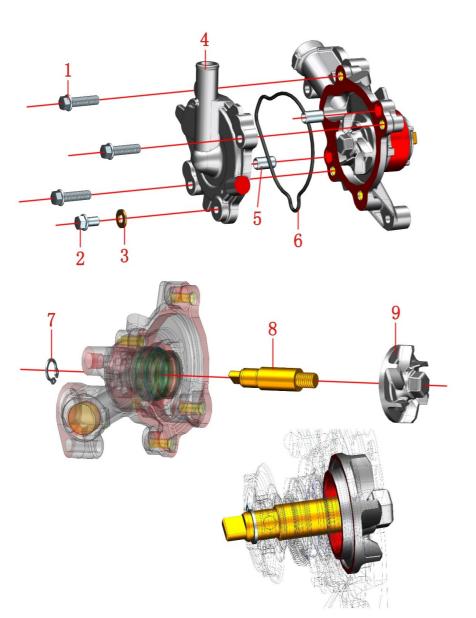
CYLINDER HEAD		Water pump assembly-2	CHK
